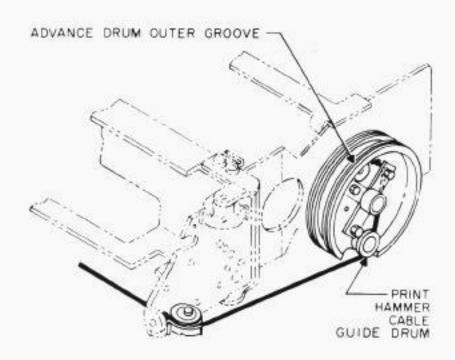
Print Hammer Cable Replacement, Securing Cable to Advance Drum
